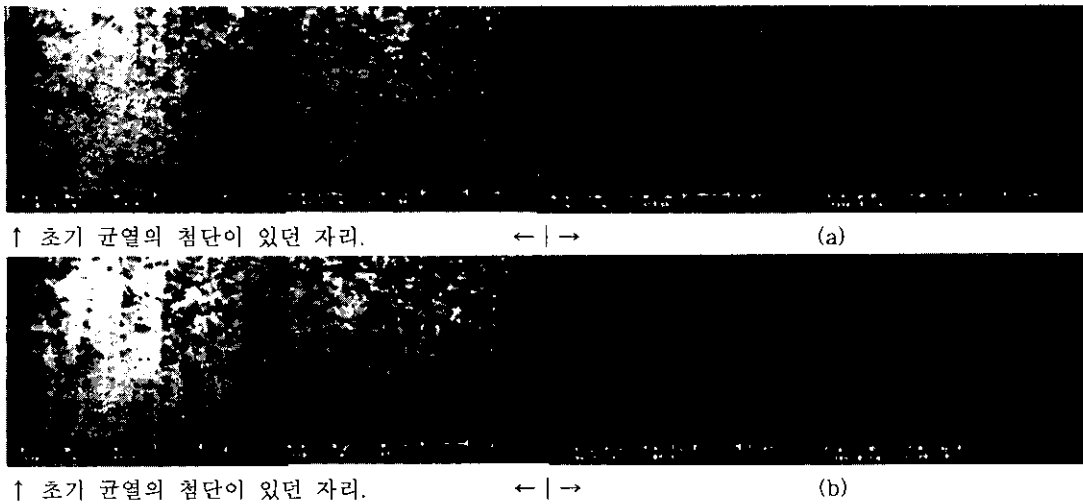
Fractographs from the (a) leadframe and (b) EMC parts after SBN tests.
